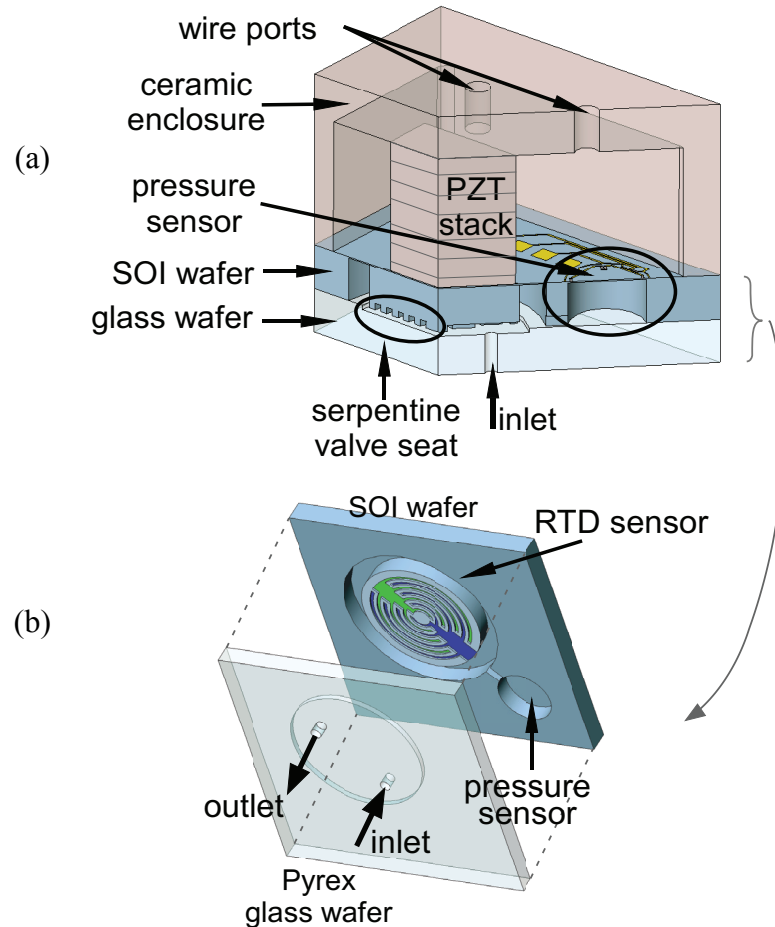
Microvalve concepts: (a) A cut away view of assembled ceramic-PZT-Si-glass valve structure. (b) A valve plate suspended by Si membrane with integrated sensors viewed from the bottom. RTD sensor is located on the back of the wafer
